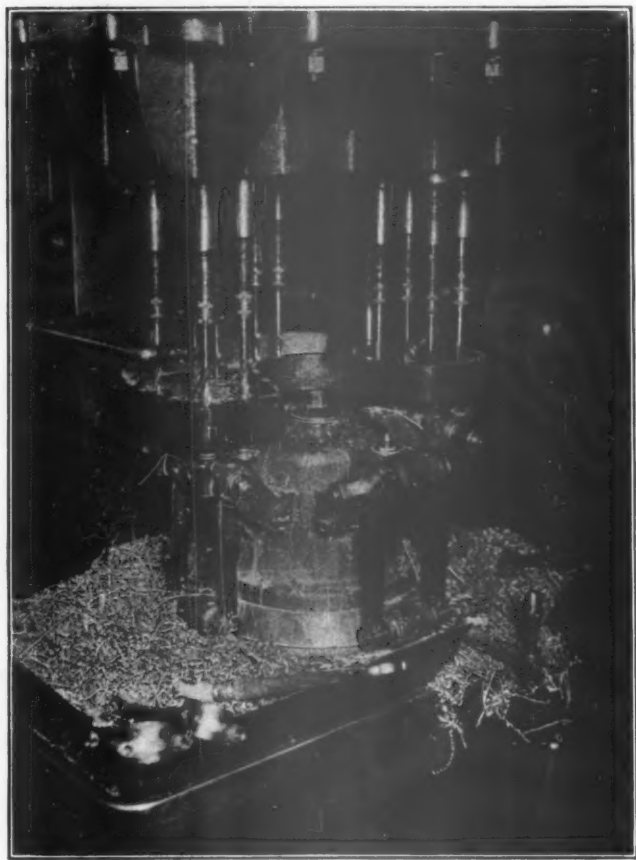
A multi-spindle machine used for drilling connecting rods.
